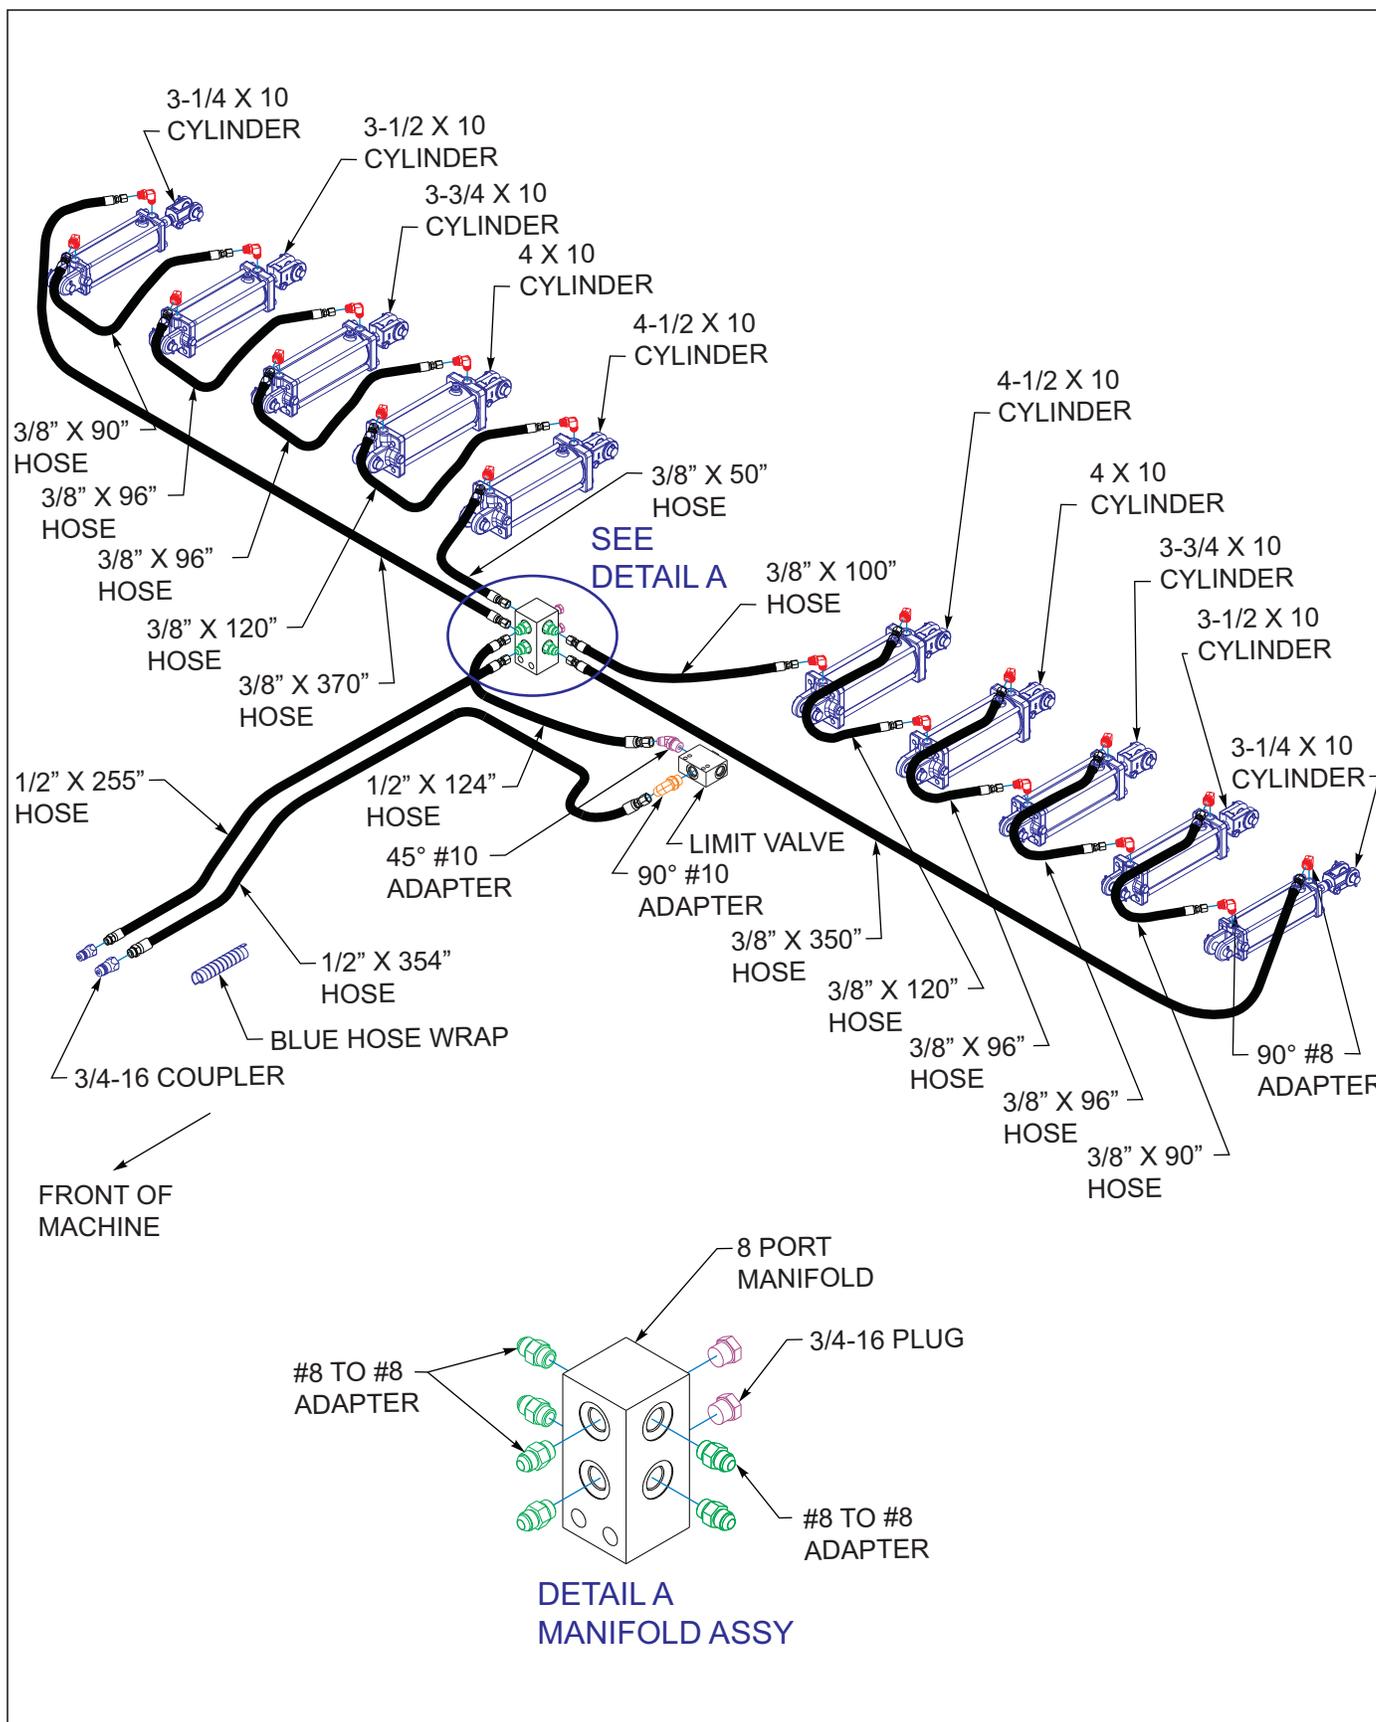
Lift Hydraulic Placement LH 1790-52'
